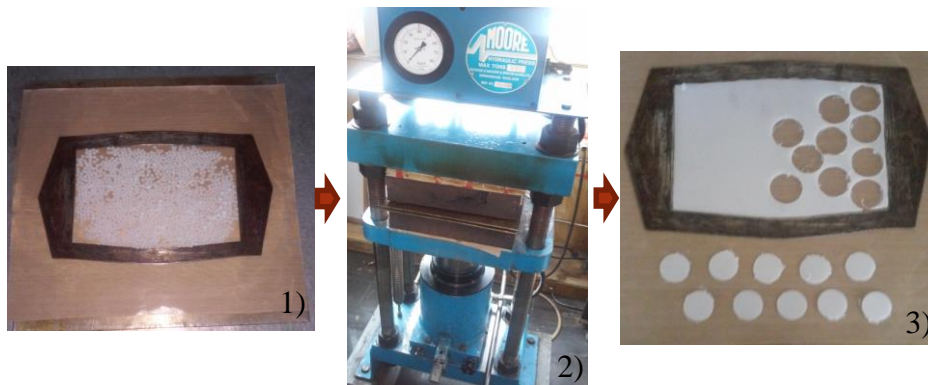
Samples production – 1) fill the mould on top of a metallic board and teflon sheet, 2) pressurization, 3) demould and samples cut
